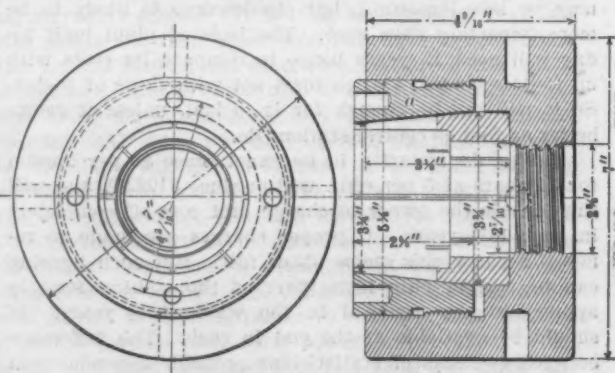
Fixture for Holding Various Size Positive Clutches While Cutting the Teeth.
